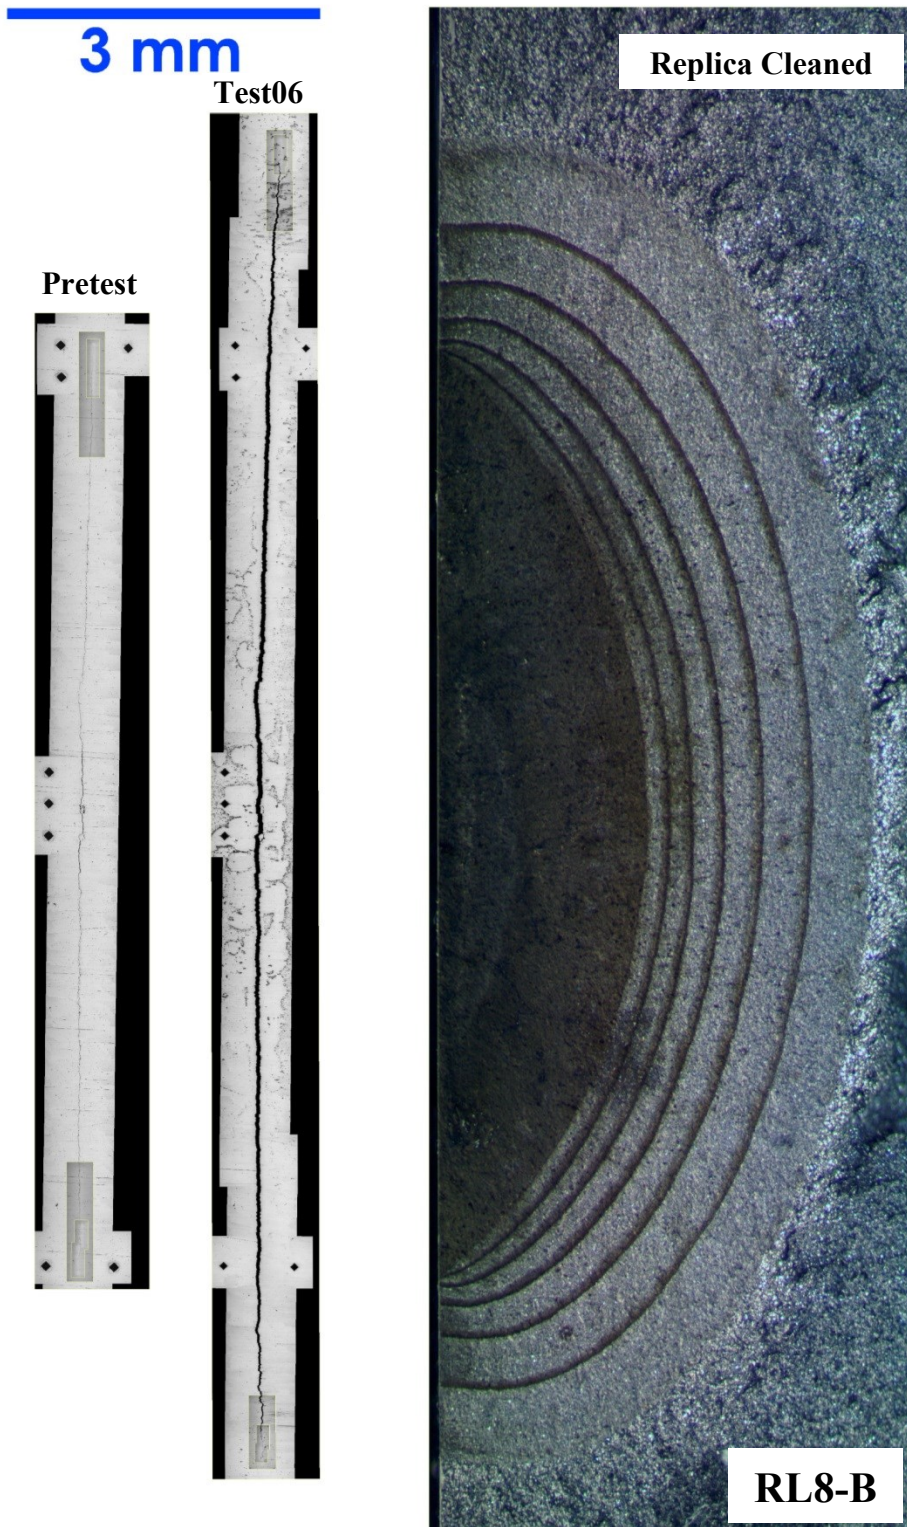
Surface images and fractograph for RL8-B. The surface images were taken prior to testing and after test06. The fracture surface was cleaned with replicating tape.
